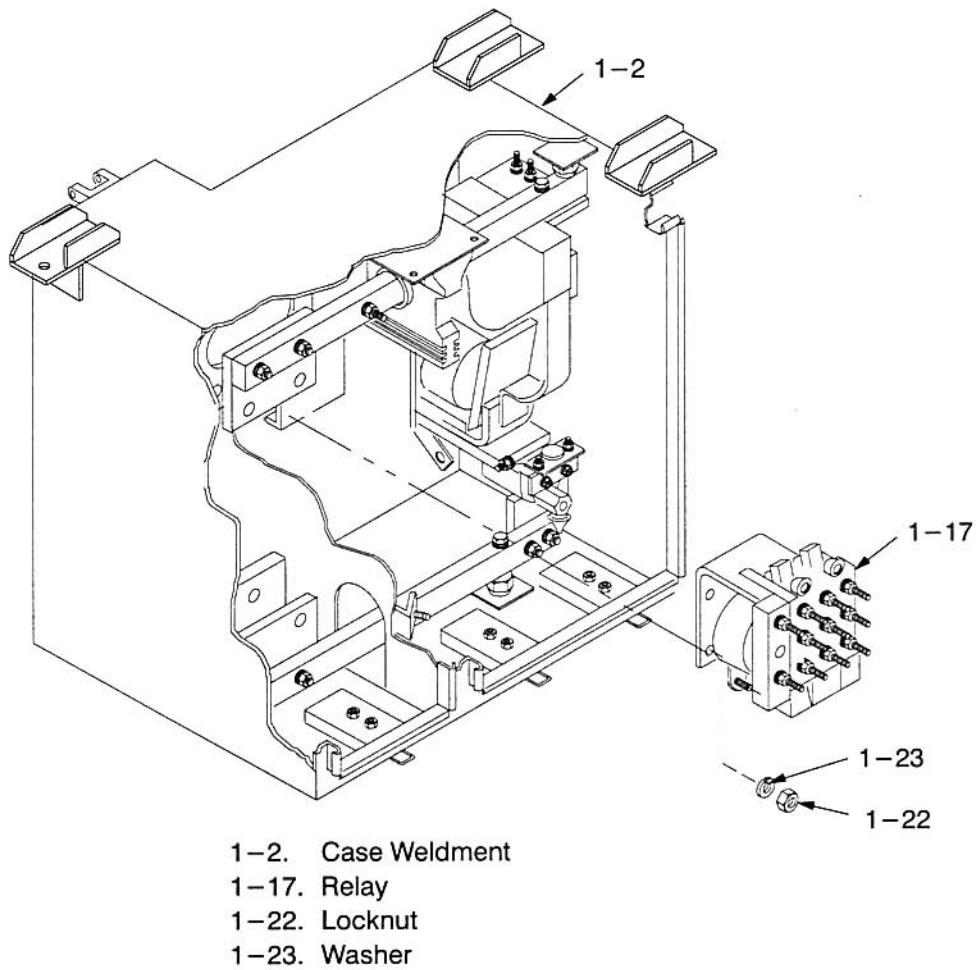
Remove/Install Relay (LBRR), 17LV66CY53
